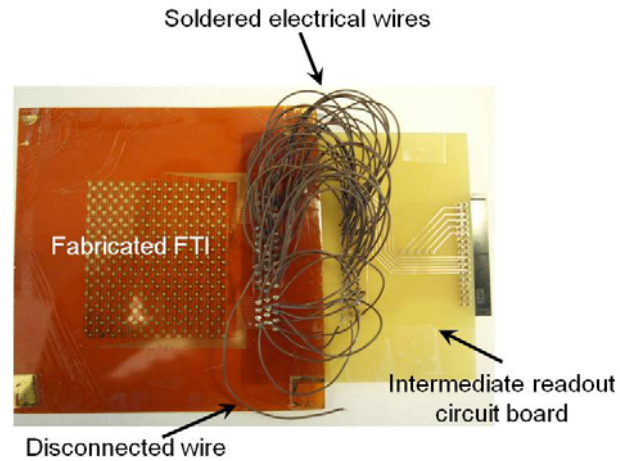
Fabricated FTI connected to intermediate readout circuit board via soldered electrical wires. The soldered wires are delicate to handle and the image identifies one such disconnected wire.
